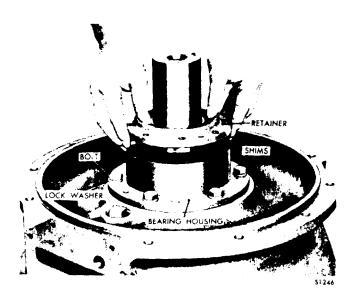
C-17. Removing (or Installing) Bearing Retainer and Shims
